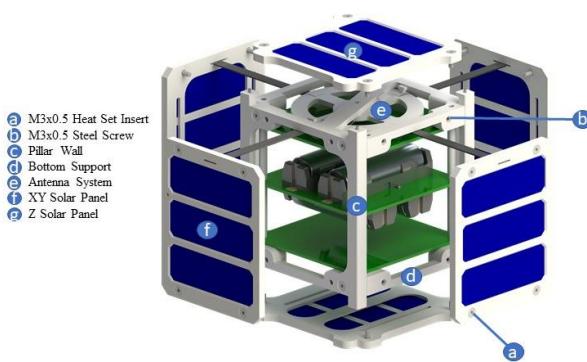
Exploded Isometric CAD Rendering of the “QubeSat”
